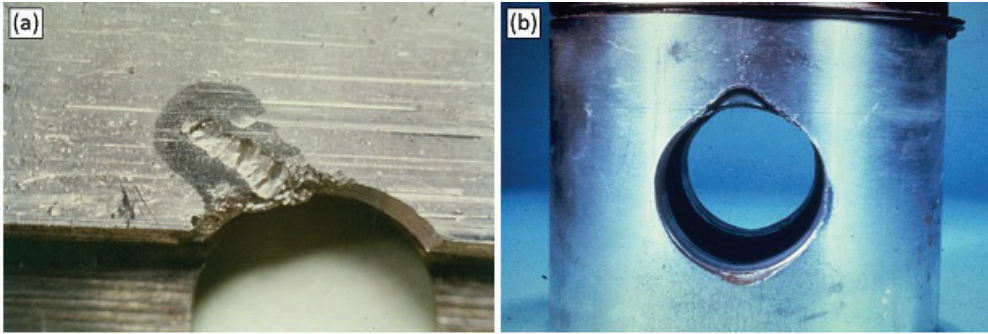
Appearance of surfaces worn by different erosive wear types: (a) journal bearing surface damaged by erosive wear (fluid erosion) [Reprinted from Engineering Failure Analysis, 44, A. Vencel, A. Rac, Diesel engine crankshaft journal bearings failures: Case study, 217-228, Copyright (2014), with permission from Elsevier] and (b) piston pin bore damaged by erosive wear (solid particles erosion)
